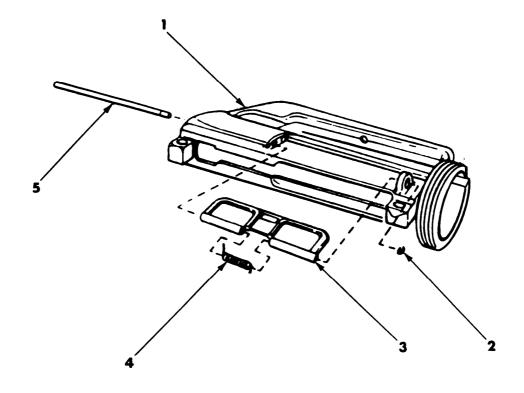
Upper Receiver Assembly (9327228) (Group 0302).
